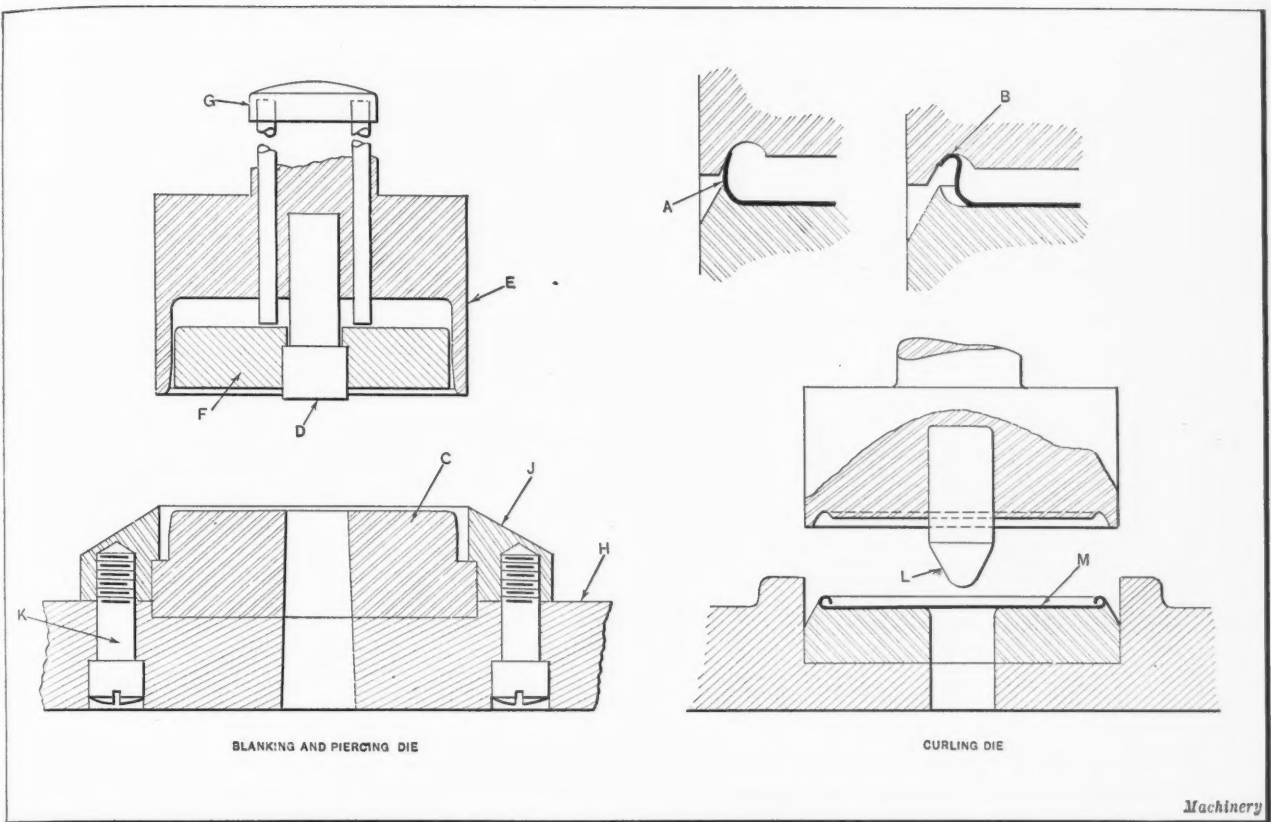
Dies for blanking and curling Ends of Metal Spool shown in Fig. 1
